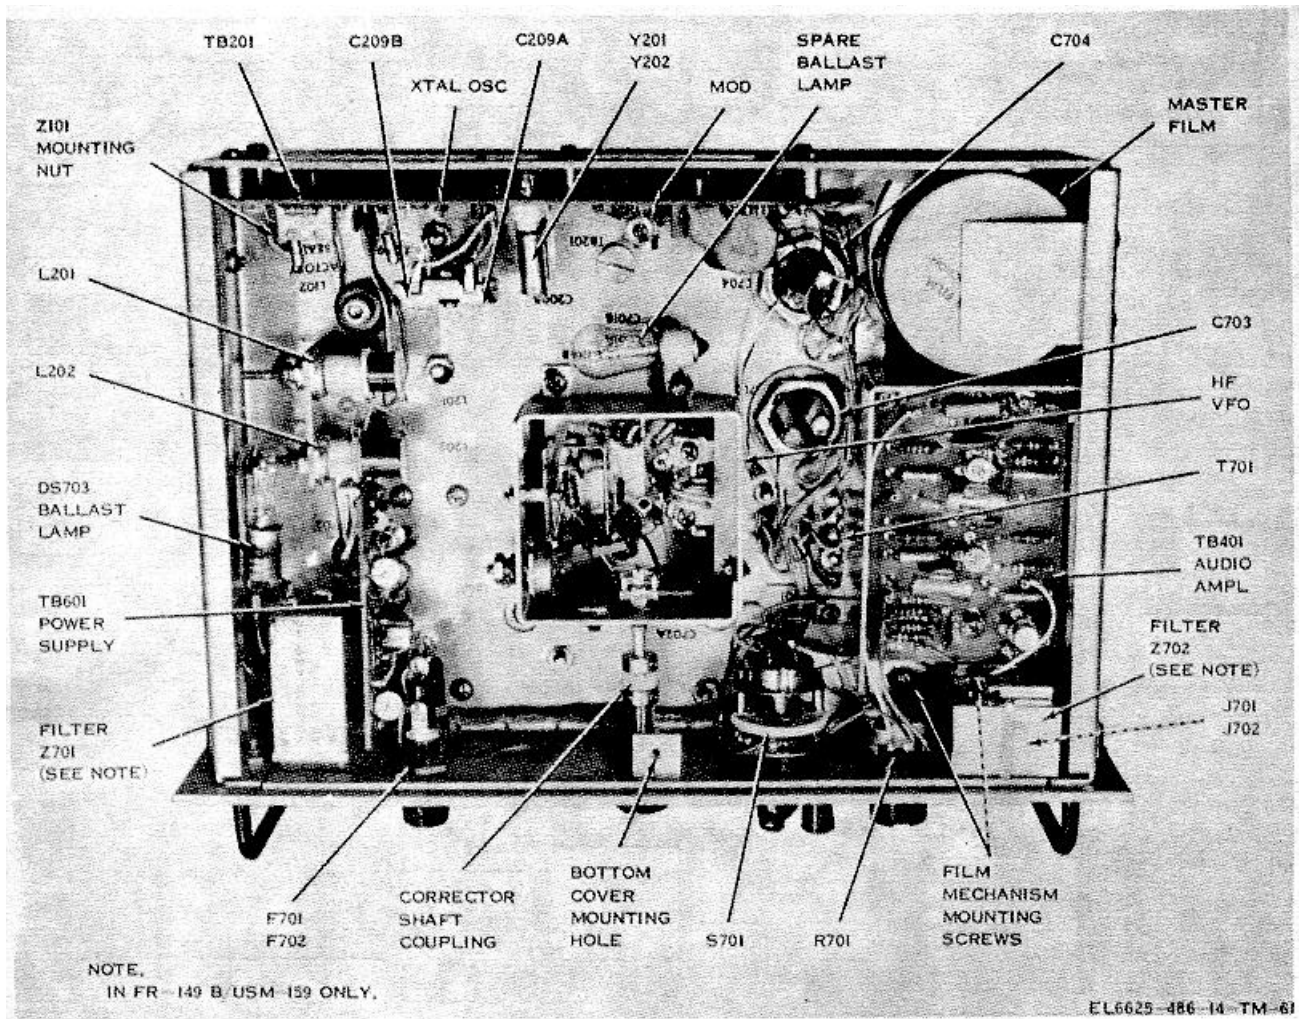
Frequency Meters FR-149A/USM-159 and FR-149B/USM-159, location of parts, bottom view.
